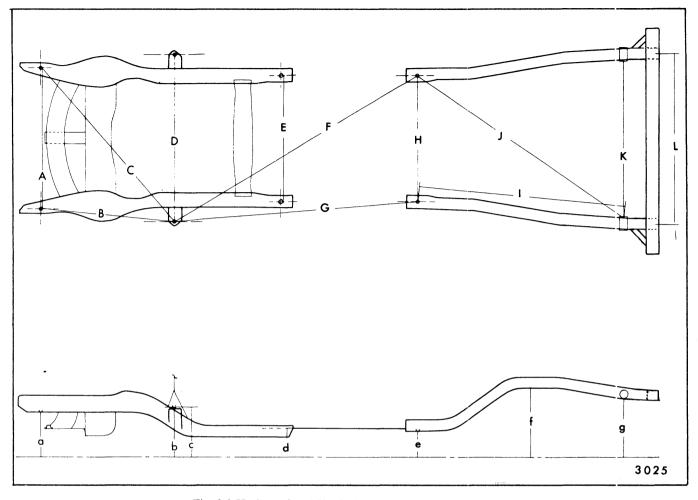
Horizontal and Vertical Checking Dimensions - "X" $$\operatorname{\textbf{Bodies}}$$
